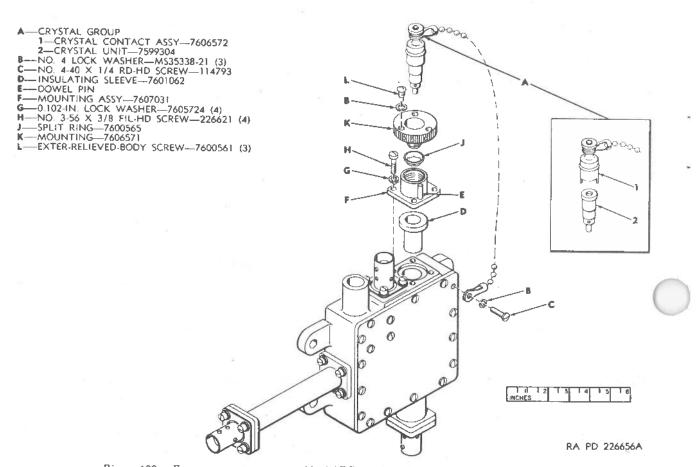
Frequency converter assembly (AFC mixer) 7621830—partially exploded view.
